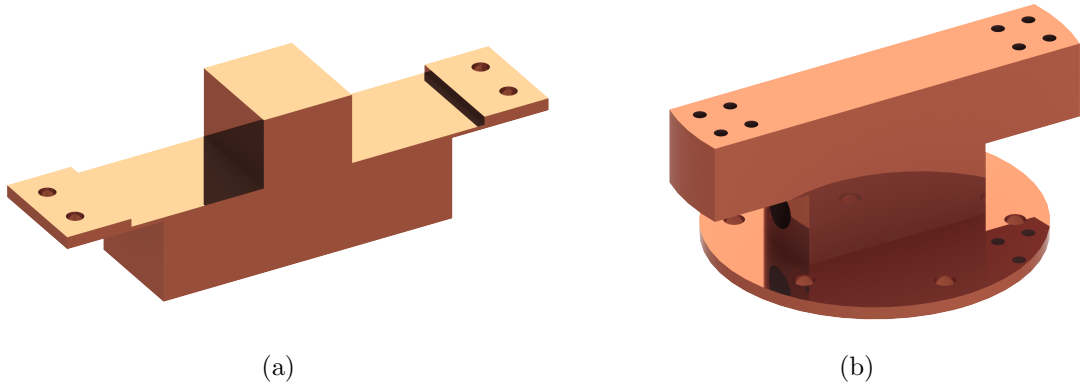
Top copper mounting block (a) that holds the chip and the bottom copper mounting block (b) which is attached to the cold stage. The assembly of these mounting blocks with its relation to the ion trap can be seen in figure 4.32.
